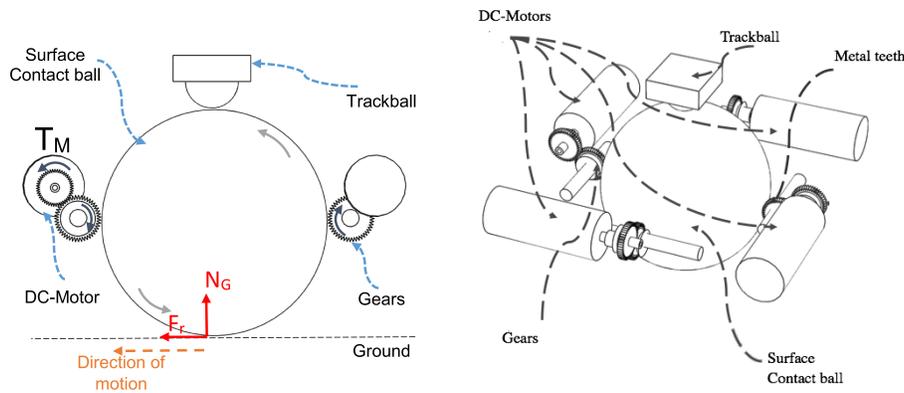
Ballpoint drive and sensing in 2D and 3D. Left: Motor-generated torques T_m are transmitted to the surface contact ball through the gears causing the ball to roll over the surface. The friction force F_f between the contact ball and the surface produces motion in x-y direction. Right: The arrangement of four DC-motors in 3D shows how the Ballpoint drive generates forces in 2 directions.
